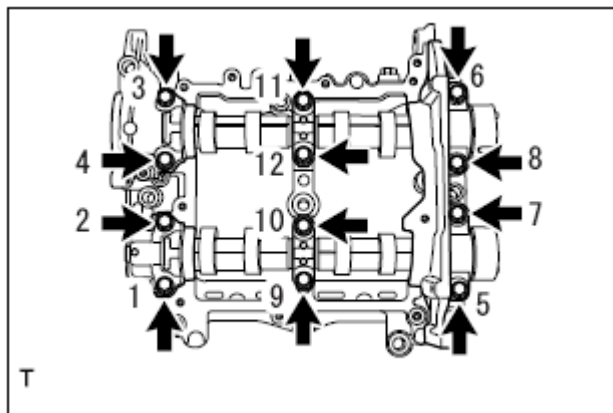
Identifying Camshaft Cap Mounting Bolts With Loosening Sequence (Bank 1 Side)
